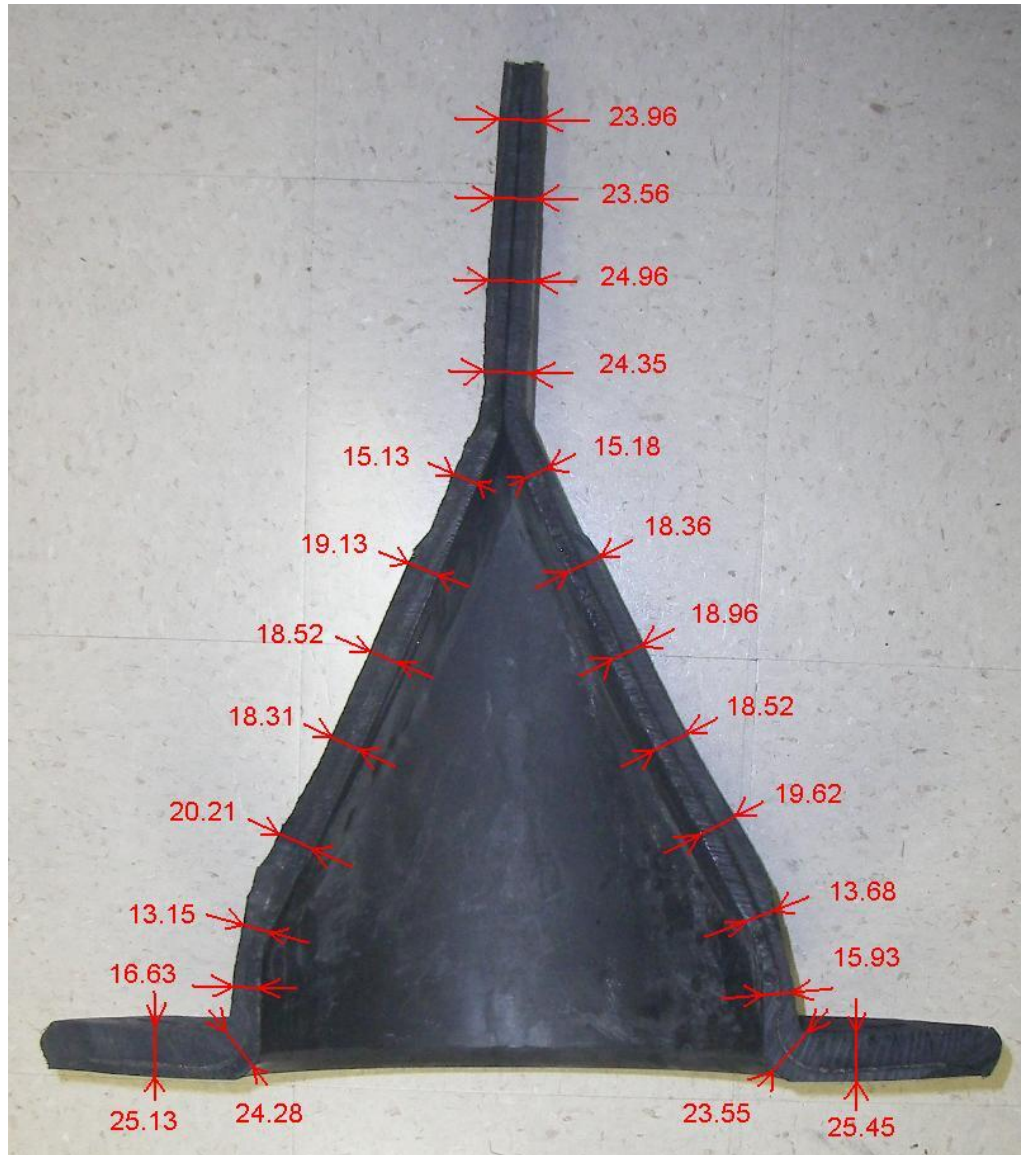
Thickness measurement of a duckbill valve (in mm)
